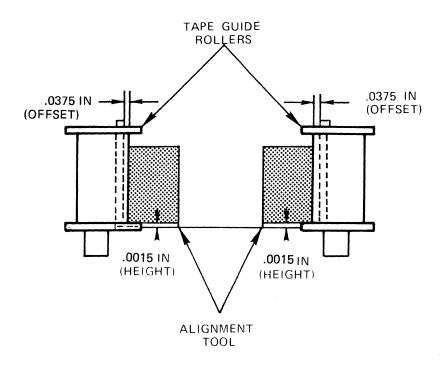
Tape Guide Roller Alignment Tool Positioning
